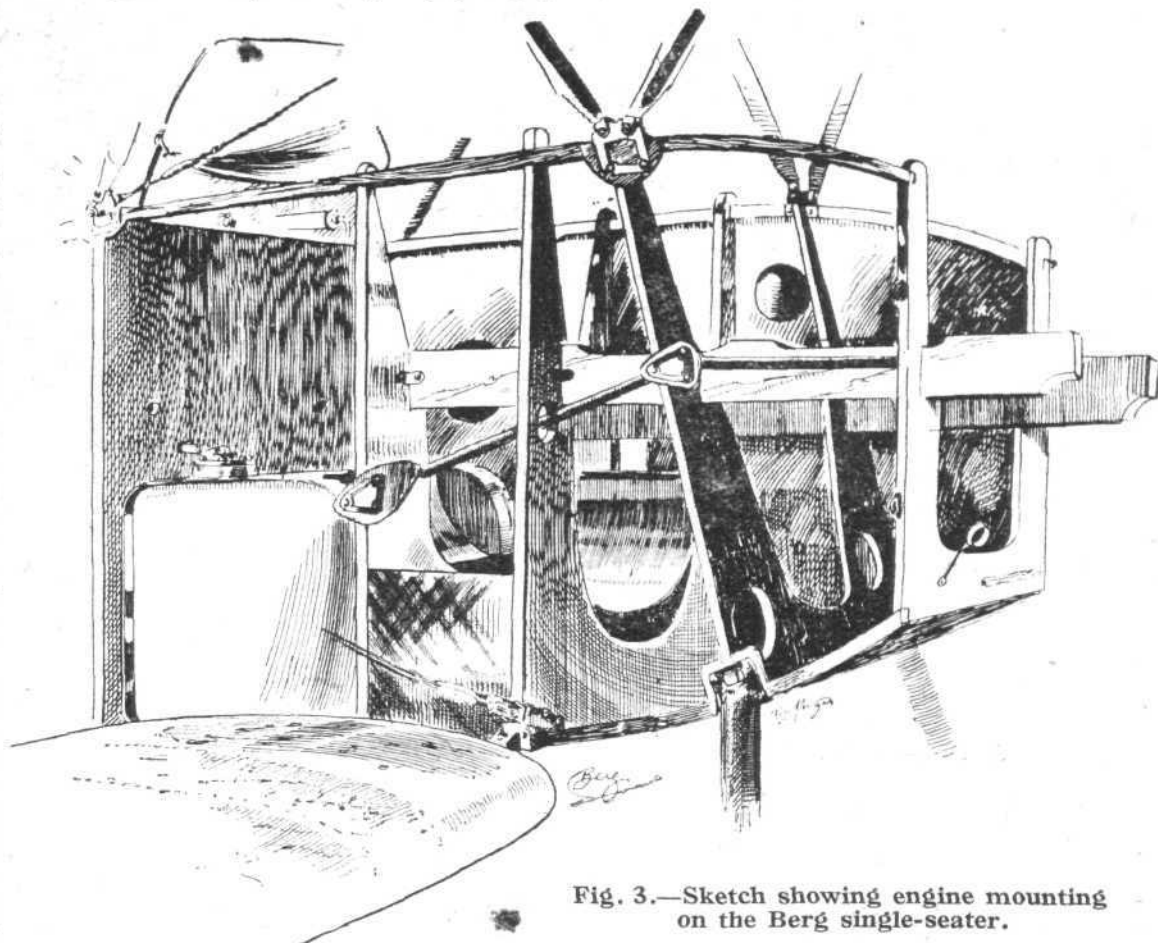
Sketch showing engine mounting on the Berg single-seater.
